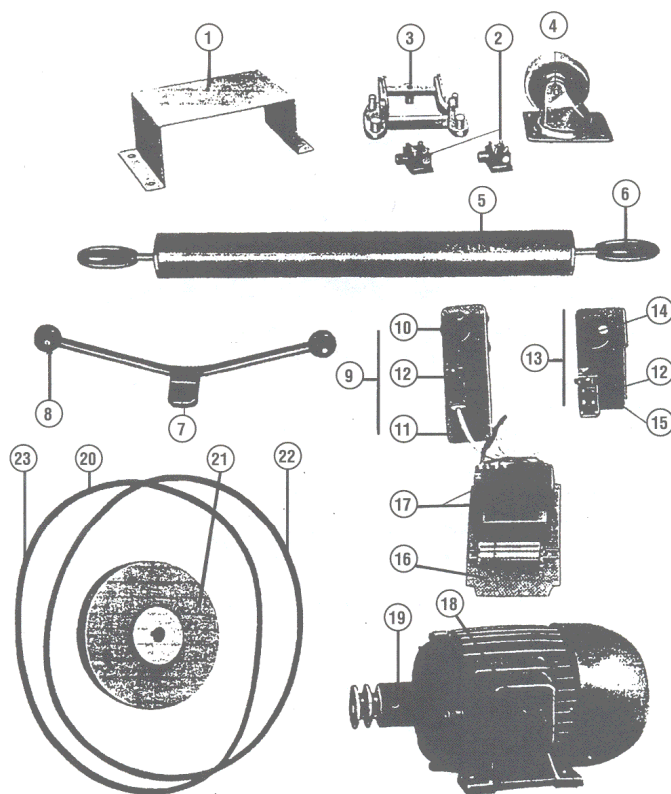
SPARE PARTS FOR MACHINE HEAD & CONVEYORS
